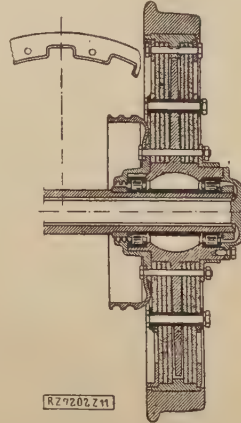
Vehicle wheel with elastic rubber disc between the rim and the wheel boss, for rail motor bus, Henschel & Sohn type.
